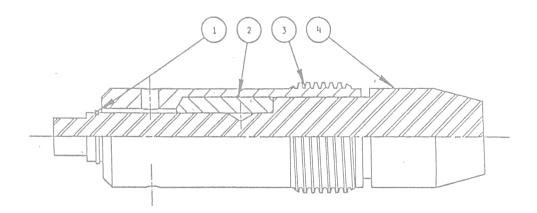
MH Seat Reaming Assembly (HA102008) HP Seat Reaming Assembly (HA102018)
